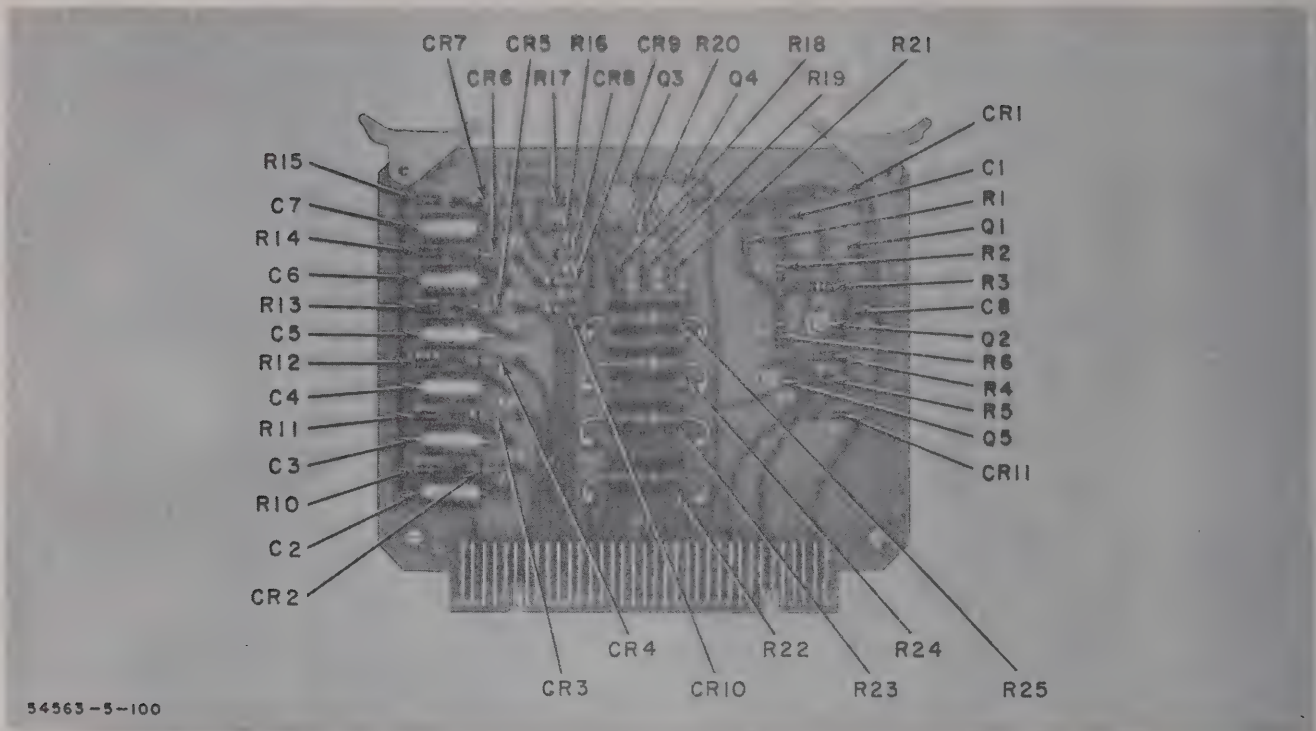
Pulse Generator and Sync Circuitry Printed Wiring Board A3,
